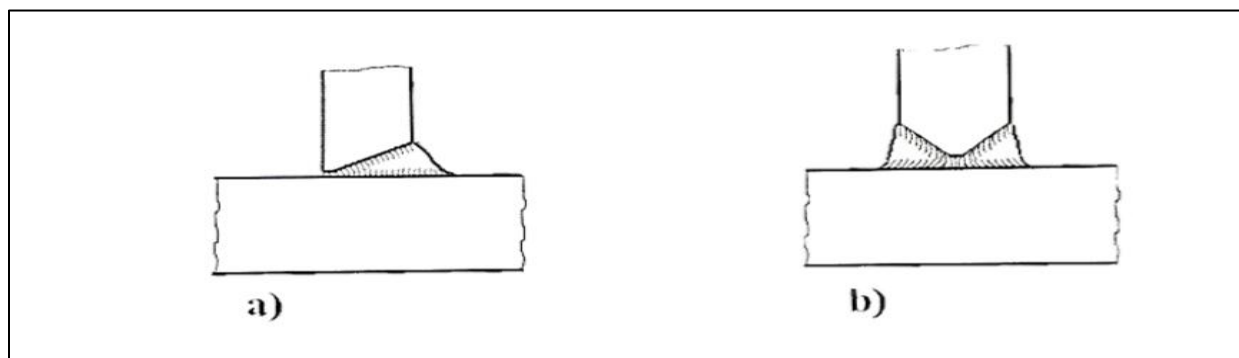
Butt welds in T-joints – (a) single-bevel butt weld, (b) double-bevel butt weld [1]
